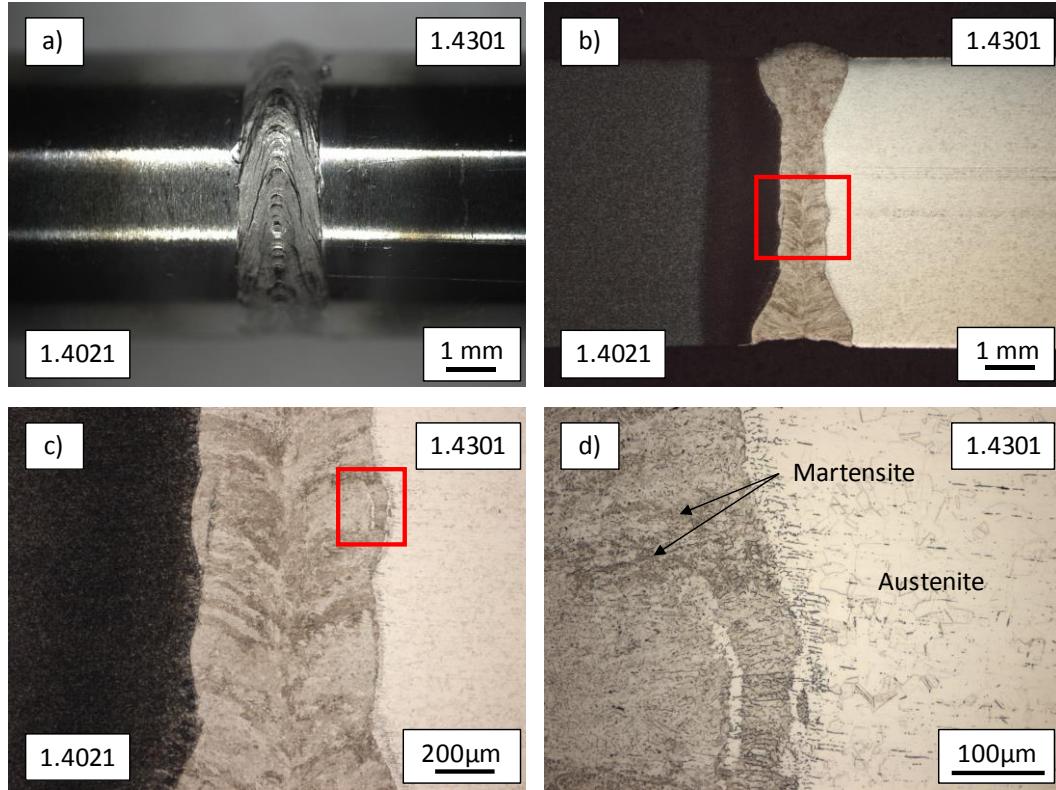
a) Welding bead; b) macro-section, c) macro-section in detail; d) micro-section
